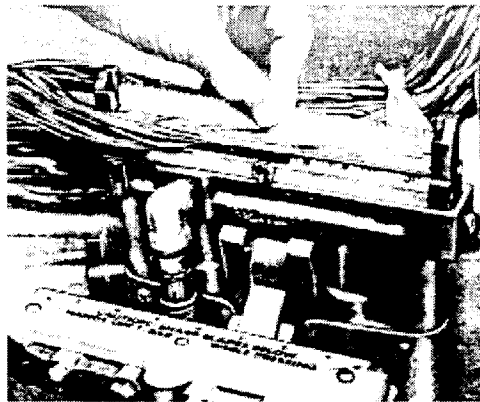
Through Cable Spliced Removed From Splicing Tool
